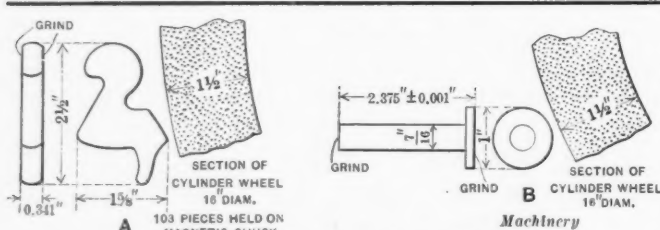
Examples of Surface Grinding on Rifle Hammers and Valve Push Rods
